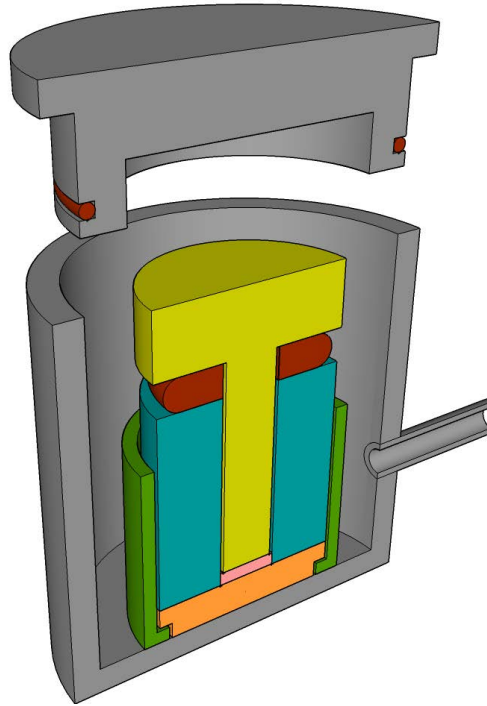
Schematic of the mold for compression molding in vacuum (dark grey, outer chamber; light green, inner piston; cyan, drum; orange, lower plate; dark green, drum-plate holder; pink, sample; red, rubbers).
